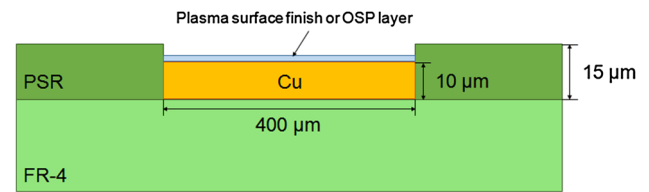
Schematic illustration of the test samples used in this study, showing the FR-4 PCB, photo solder resist (PSR), the Cu pads, and the surface finish layers.
